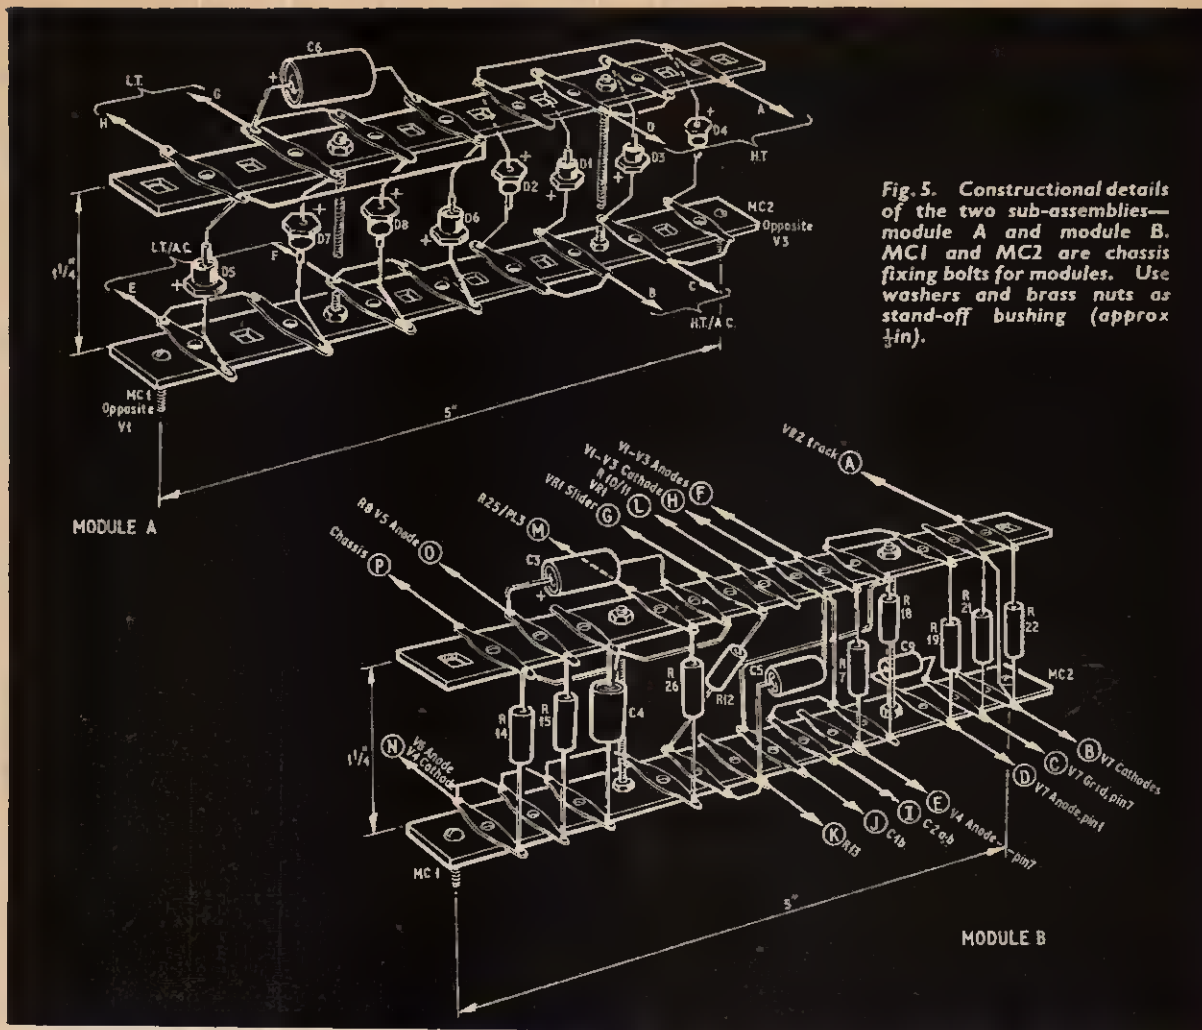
Constructional details of the two sub-assemblies—module A and module B. MC1 and MC2 are chassis fixing bolts for modules. Use washers and brass nuts as stand-off bushing (approx 1/4 in.).
